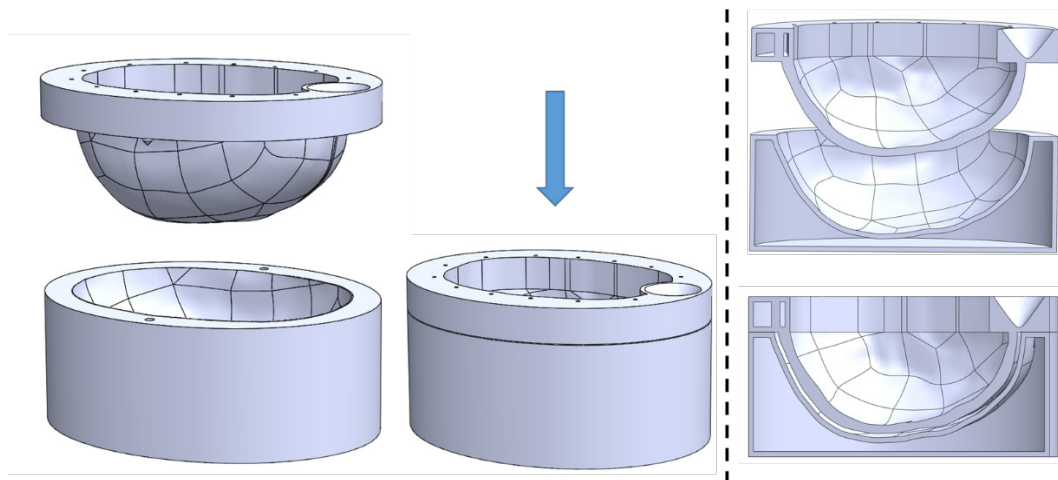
(Left) Isometric view of opened and closed mold CAD. (Right) Sectioned view of mold CAD; visible is the 3-mm thickness mold cavity.
